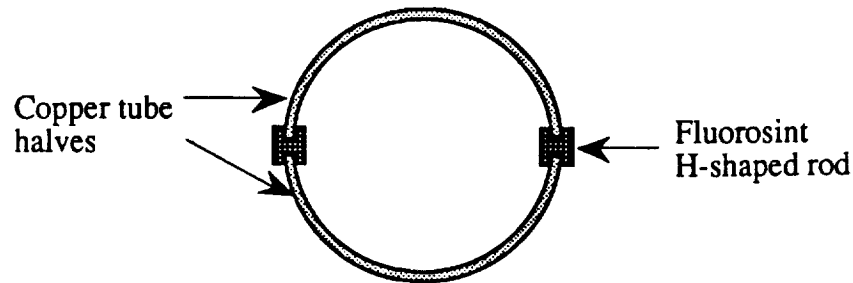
Insulating the tube halves using an H-shaped rod
